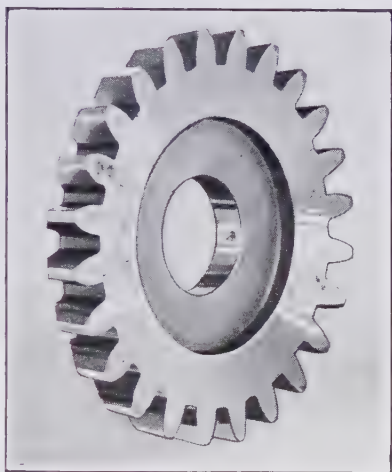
A Fellows gear-shaping cutter of 3-in. pitch diameter.
